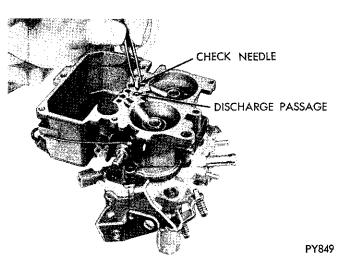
Installing Accelerator Pump Discharge Check Needle
